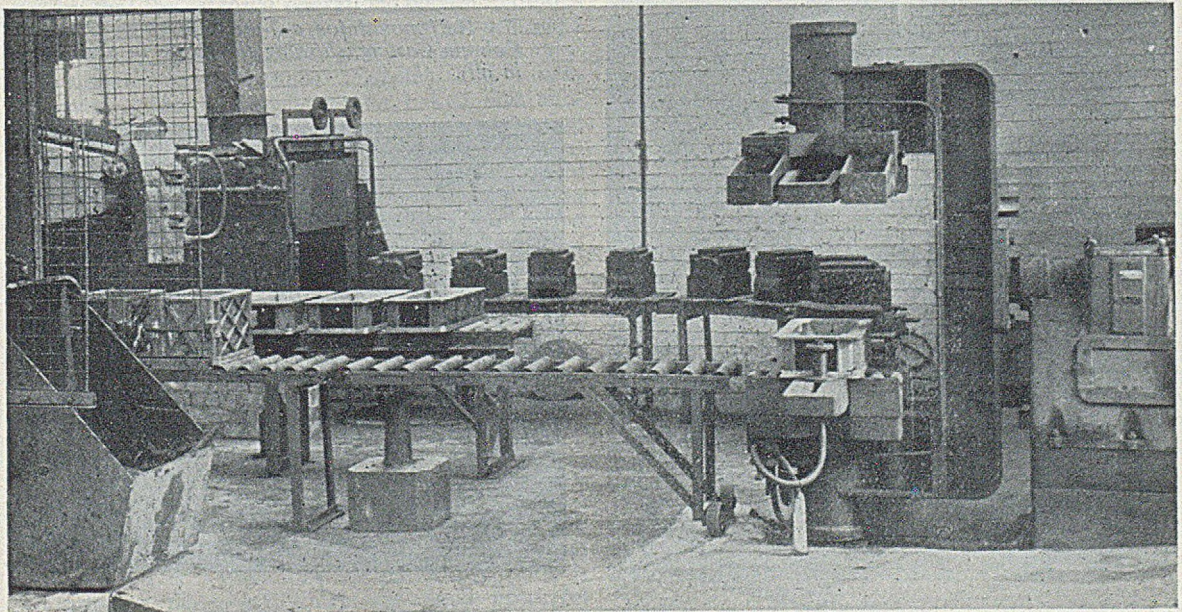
Core-turnover Machine used for the Smaller Coreboxes shown in Fig. 3. The Ramming Head, Roller Conveyor and (background) Tunnel Drying Oven can also be seen.
